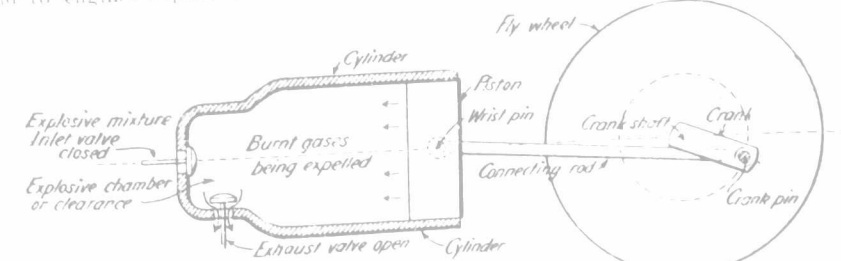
CLEARANCE STROKE: THE PISTON RETURNING TO DRIVE OUT THE BURNT GASES—VALVES OPEN.
